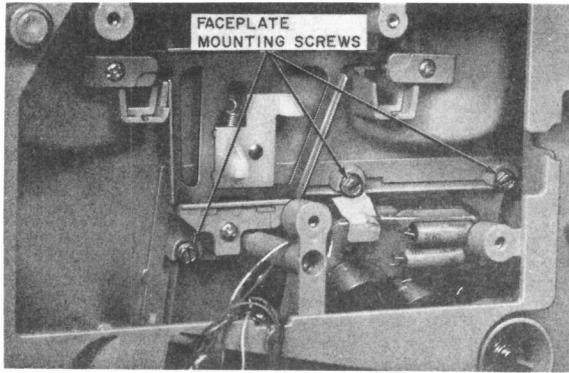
Removing Faceplate from Set Equipped With TOUCH-TONE Dial
